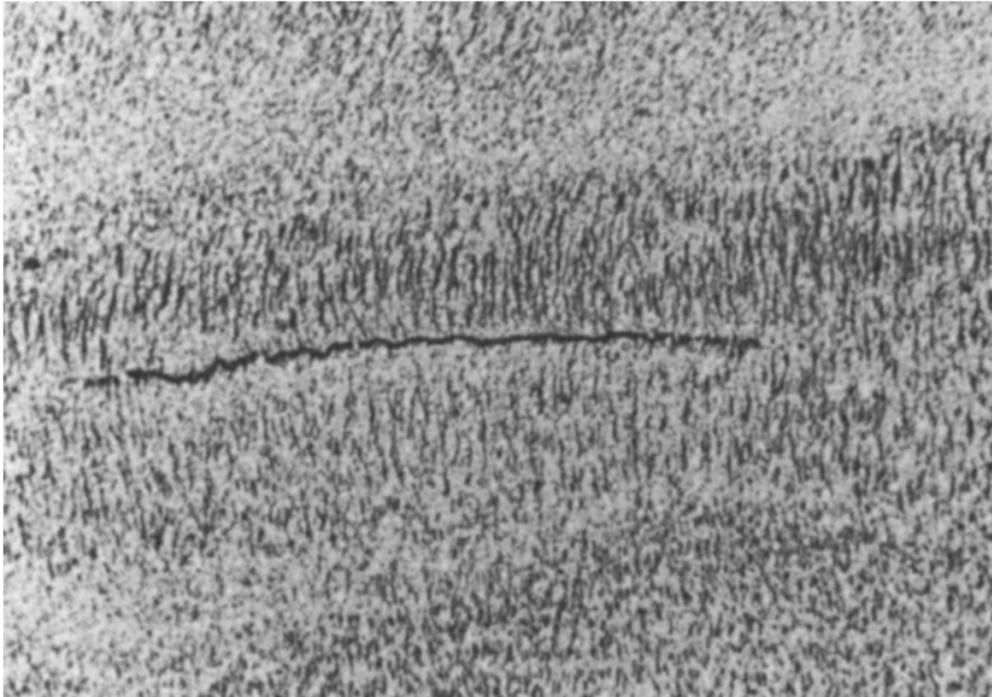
Magnetic particle test indicating longitudinal crack in weld [Halmshaw, 1996].
